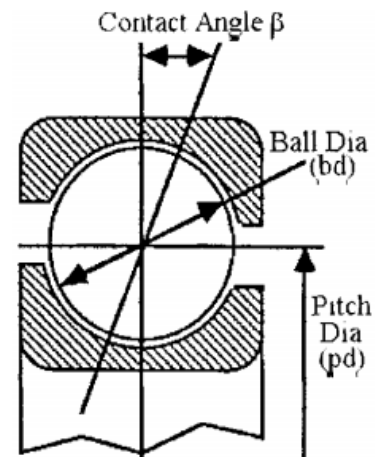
BEARING CONTACT DIAGRAM [16]
